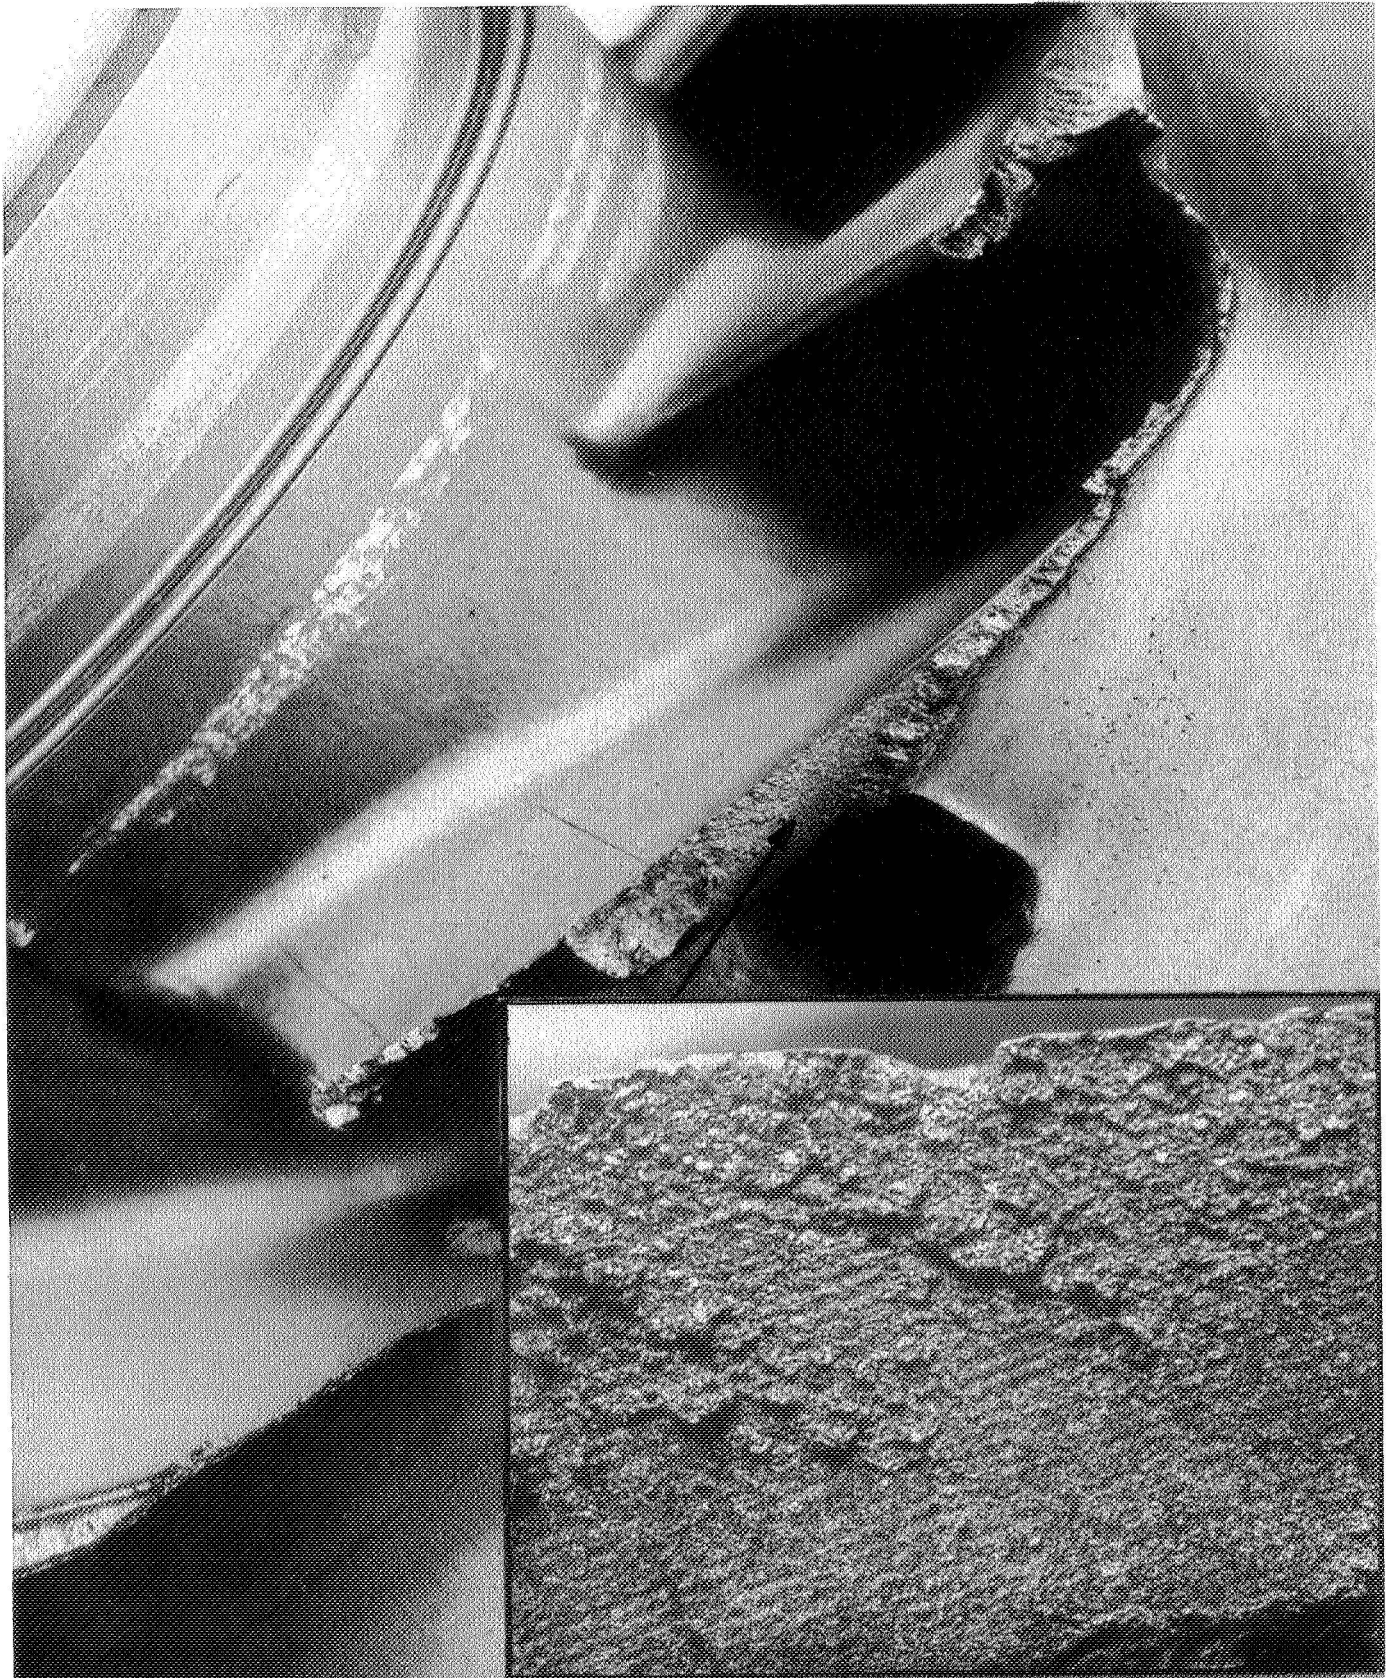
15X Magnification of Machining Marks at Diffusion Bond Failure
